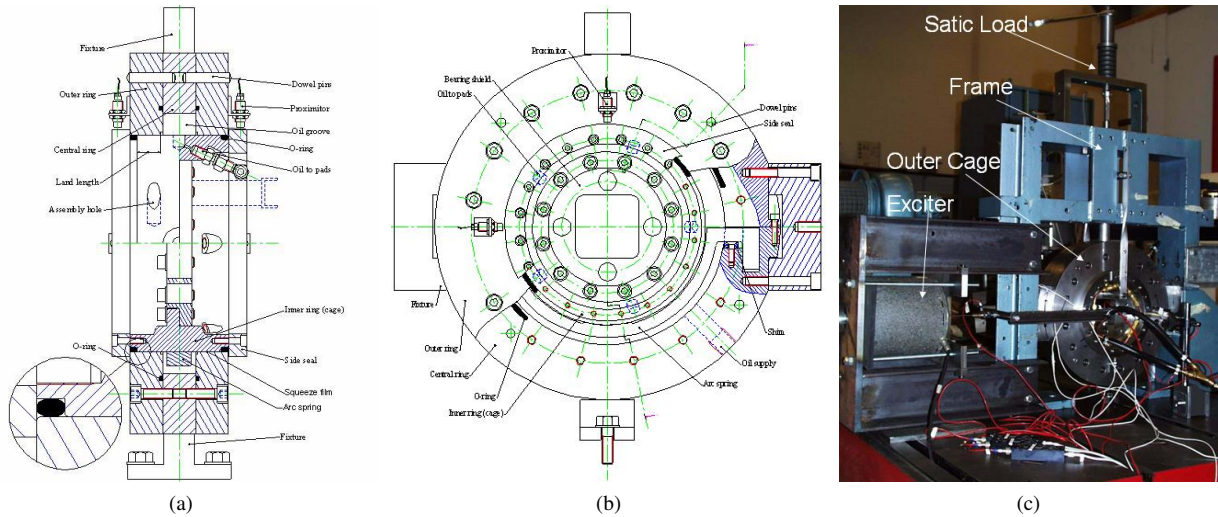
(a) Cross-section of test damper bearing, (b) Front view of test damper bearing, (c) SFD test rig
